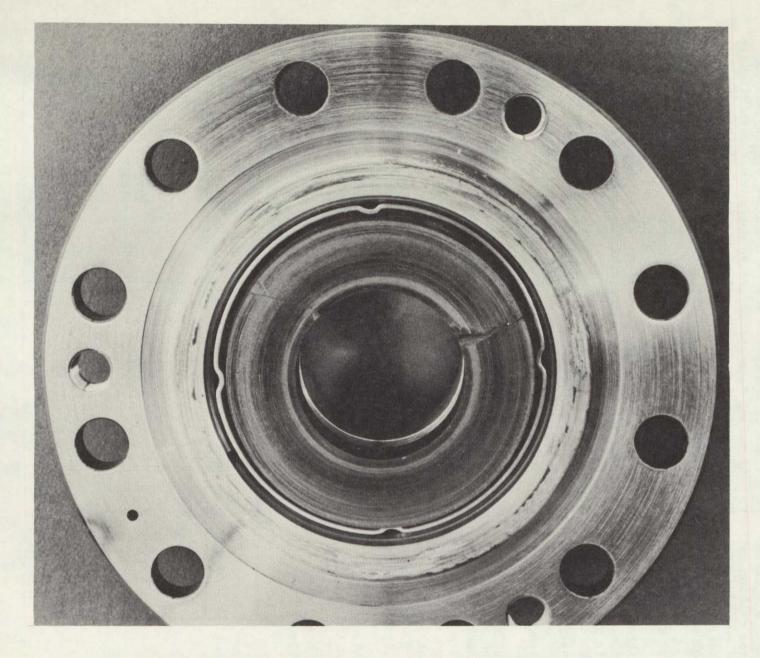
Spiral Groove LOX Seal (P/N RS009695X, S/N 01, Damaged by Bearing Failure Posttest 092)
